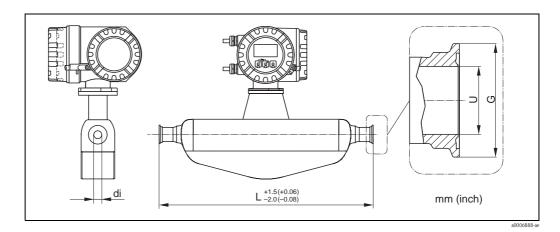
Detail A: The flange has the smaller groove for the O-ring on the sensor side. When mounting the sensor the corresponding flange must have accordingly a larger groove.
